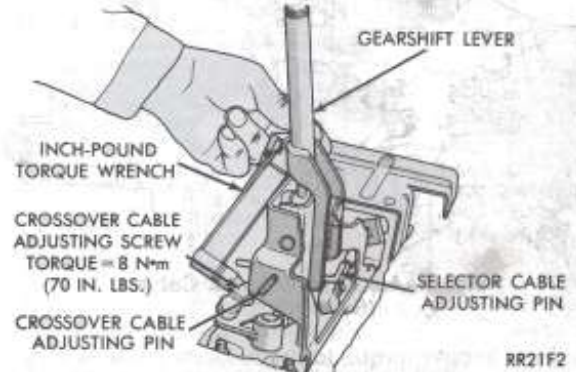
Adjusting Crossover Cable (H,K,P-Bodies)
